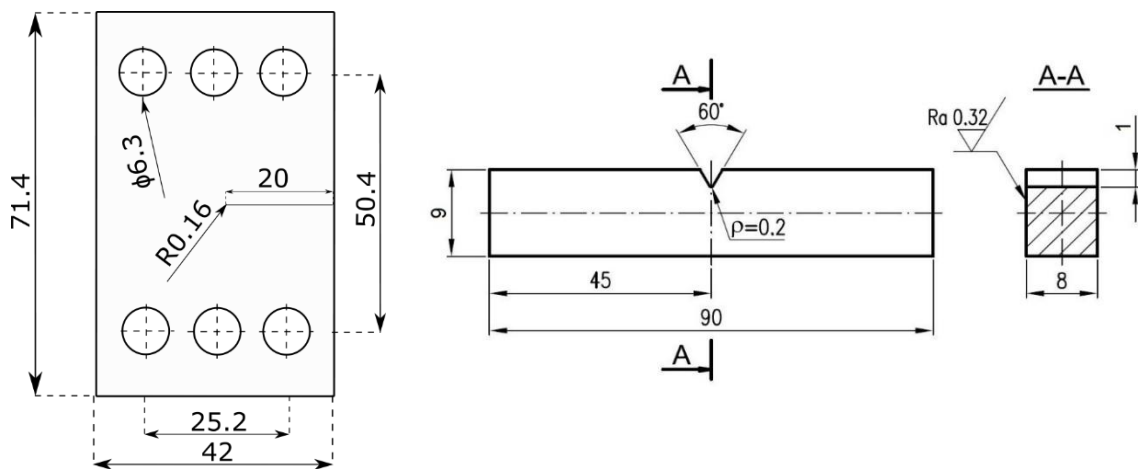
Shape and dimensions of CTS and rectangular cross-section specimens; all dimensions given in mm.
